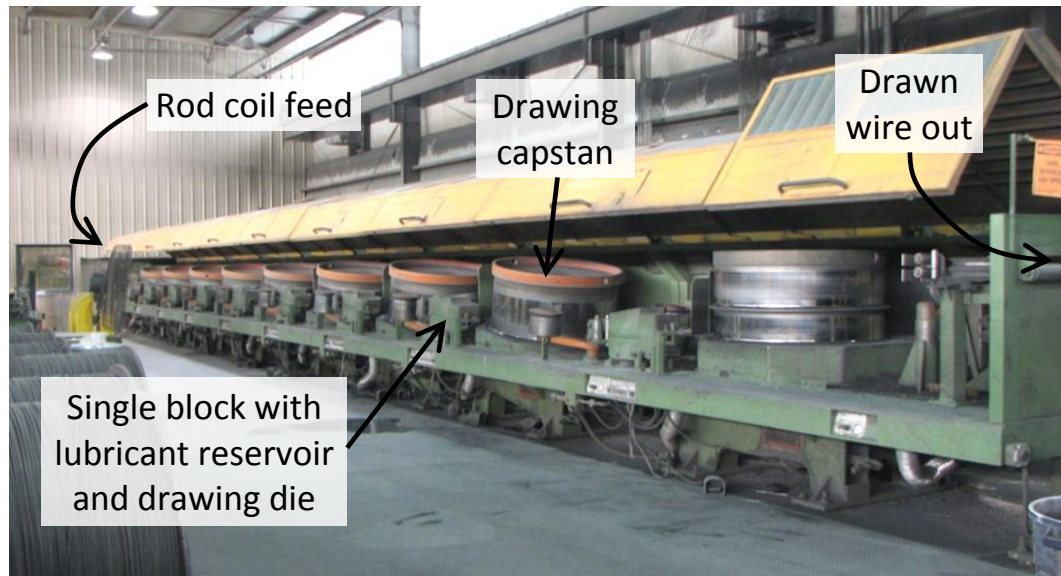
Wire drawing machine, Sumiden Wire Products Corp. (SWPC, Dickson, TN)
